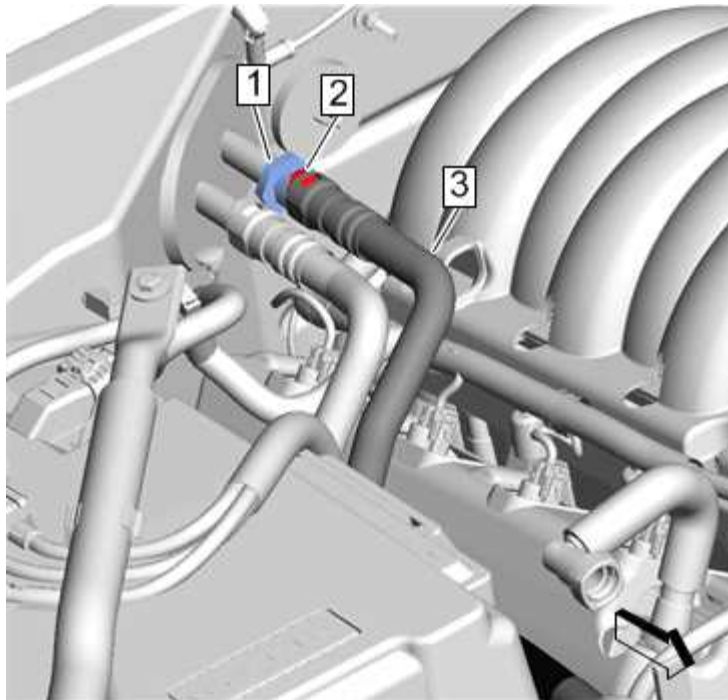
Heater Inlet Hose And Heater Core Inlet Tube
